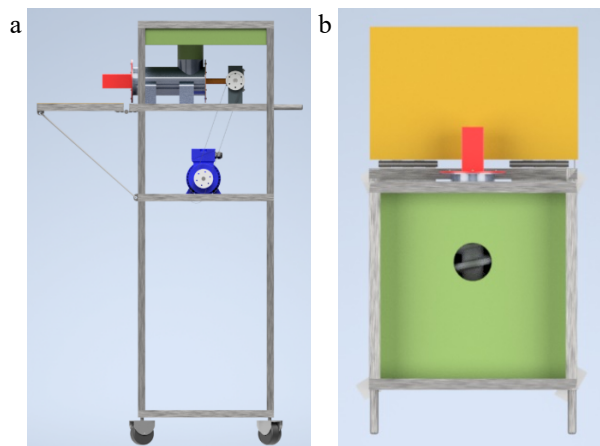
(a) Product Prototype Design Side View; (b) Product Prototype Design Top View
